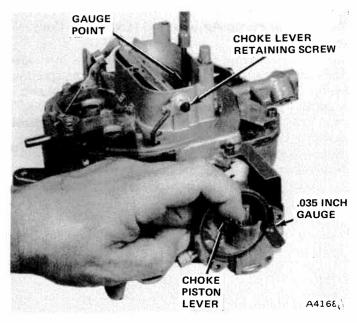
Initial Choke Valve Clearance Adjustment
